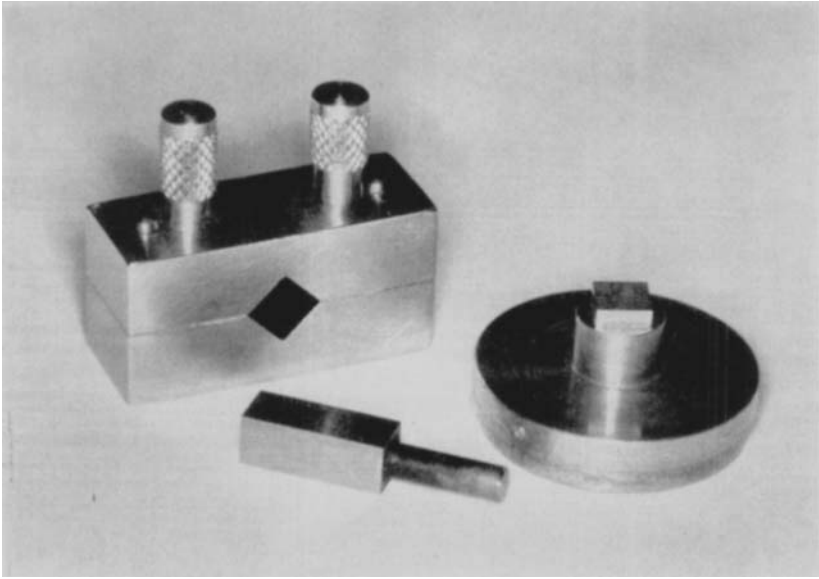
Steel mold and pistons used in preparation of the cubic amalgam specimens.
